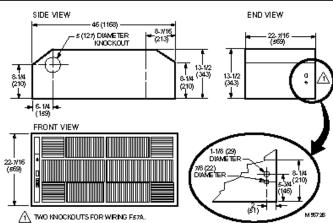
Approximate dimensions of F57A in. in. (mm).
